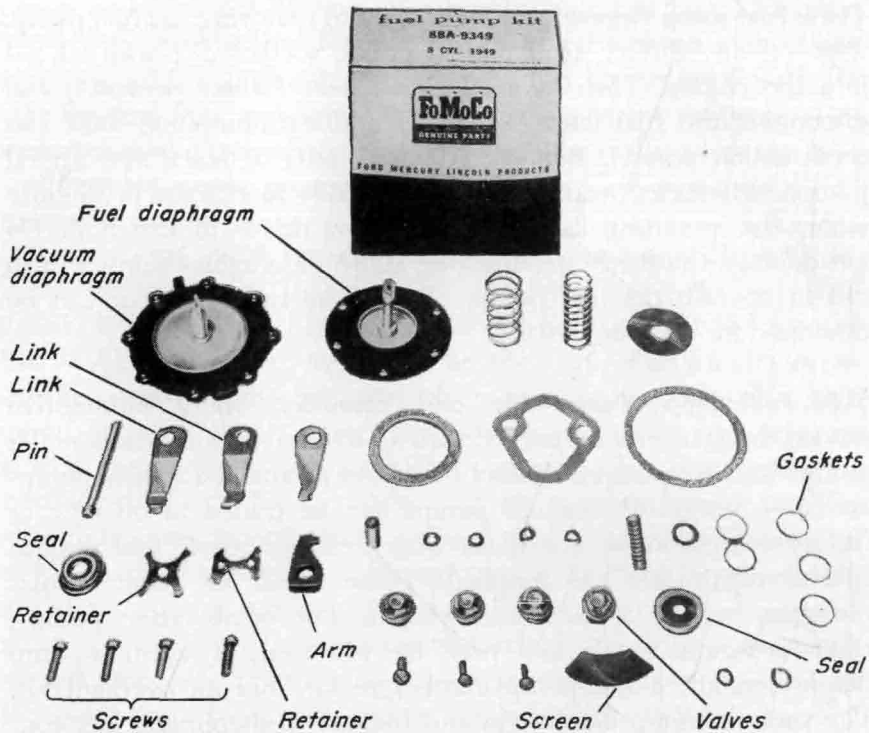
Repair kit for a combination fuel and vacuum pump. (Ford Motor Company)
